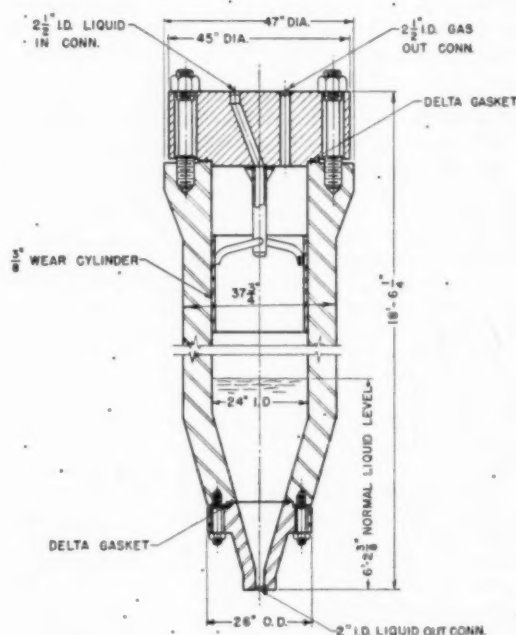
COLD CATCHPOTS AND COMPRESSOR SECTION TRAPS
